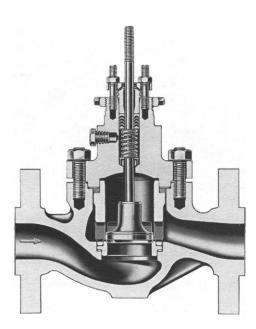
Cage-trim plug valve with solid plug Courtesy of Emerson Process Management
